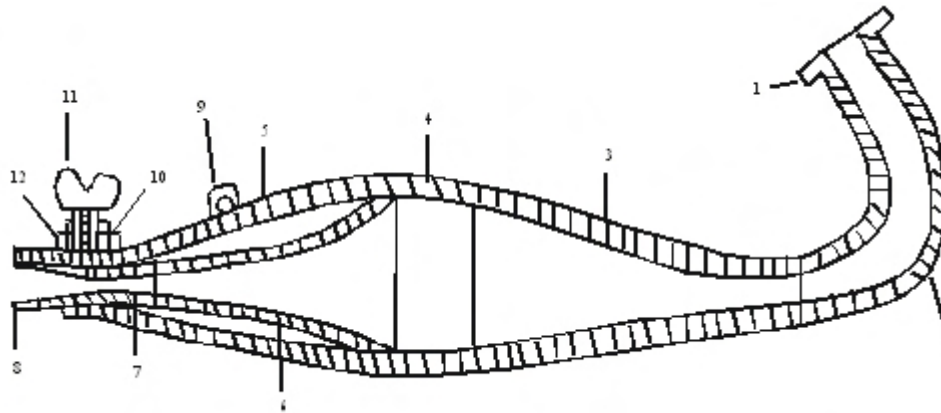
Optimized adjustable exhaust pipe, 1 = Flange; 2 = Inlet pipe; 3 = Divergent cone; 4 = Cylindrical; 5 = Rear cone; 6 = Convergent cone; 7 = Baffle member; 8 = Tailpipe (slideable); 9 = Attaching lug; 10 = Nut; 11 = Wing; 12 = Securing pipe
